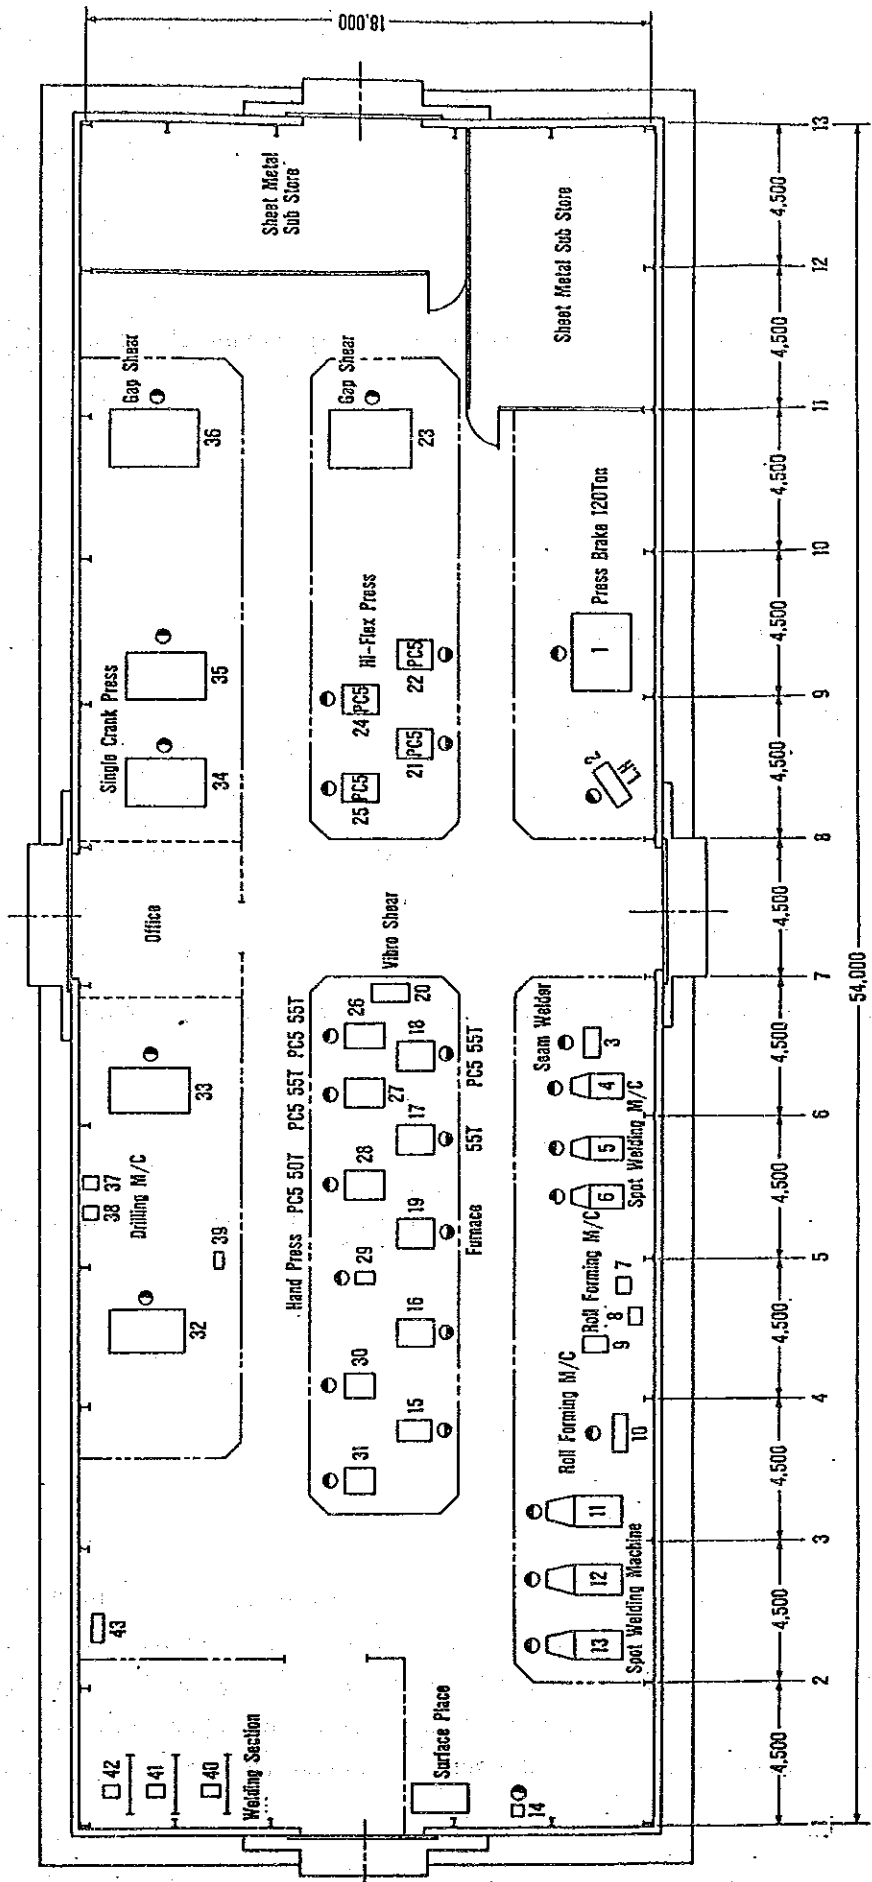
MACHINE LAYOUT OF PRESS AND WELDING
